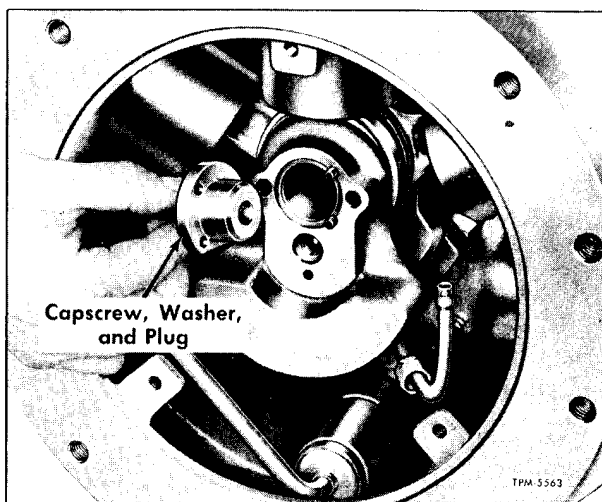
Replacing Counterweight, Plug, Washer, and Cap Screw
